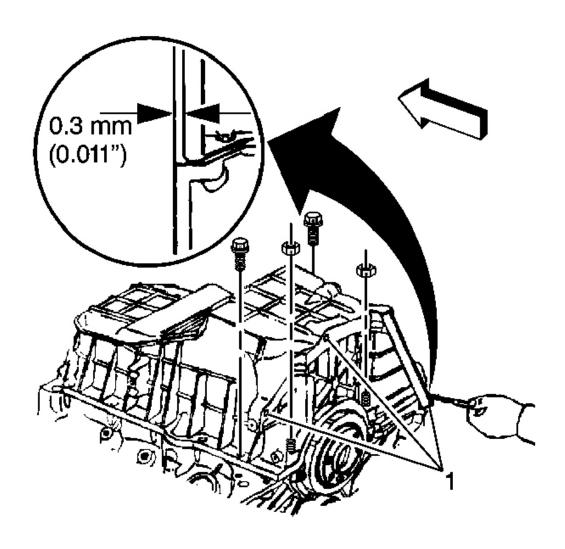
Measuring Pan-To-Transmission Housing Clearance Courtesy of GENERAL MOTORS CORP.
